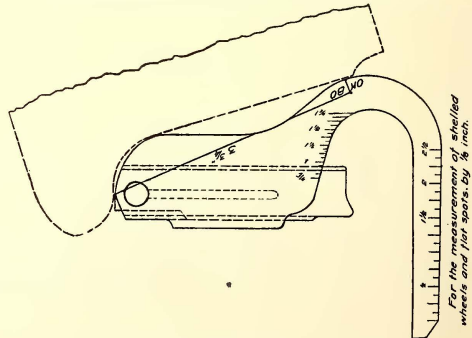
DETERMINING CONDITION OF A WHEEL HAVING A BROKEN RIM
